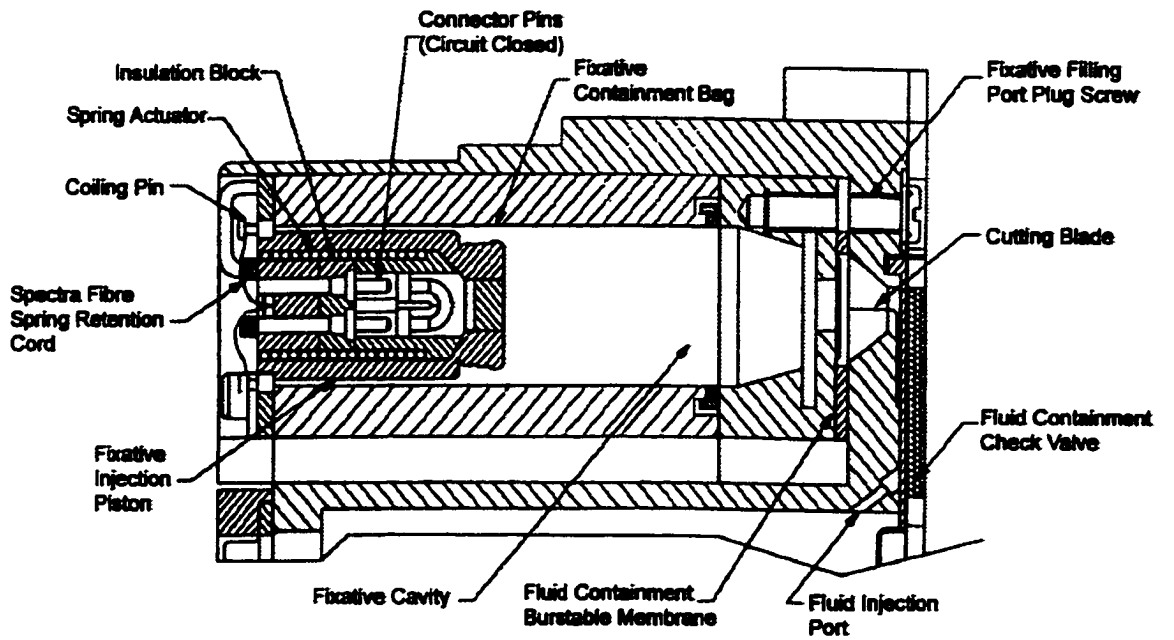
Diagram illustrating the Fixative Block Assembly.
